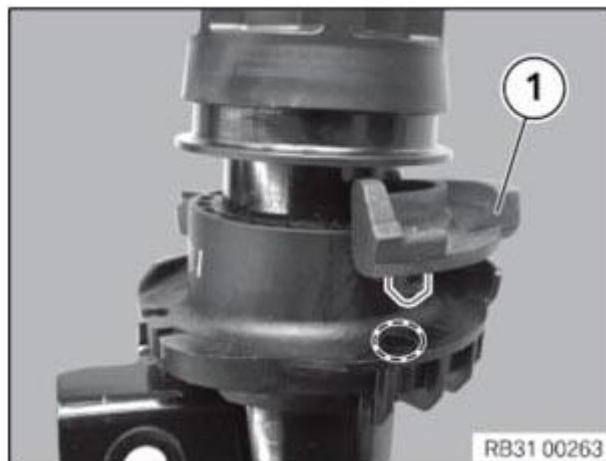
Adjusting Front Spring Strut Bottom And Top Nuts Using Special Tools (2 356 943 A) And (2 356 943 C)
